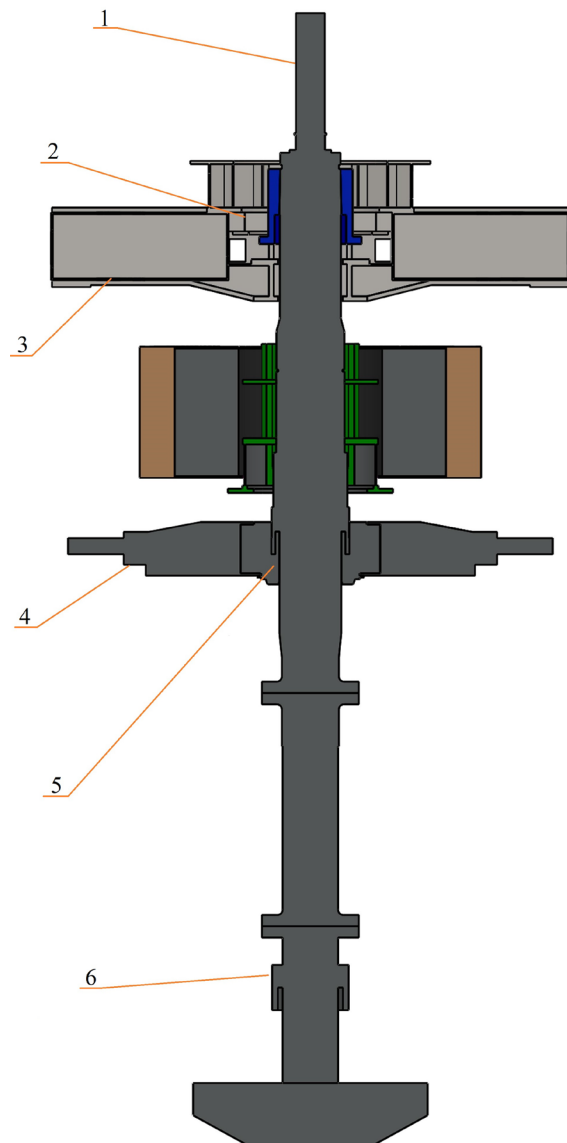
3D model of the structure of actual hydrogenerator-motor in cross-section: 1 – acceleration engine, 2 – upper generator bearing, 3 – upper crosshead, 4 – lower crosshead, 5 – lower generator bearing, 6 – turbine bearing
